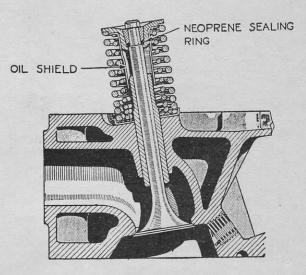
The valve springs should always be replaced with the closed coils against the cylinder head.
